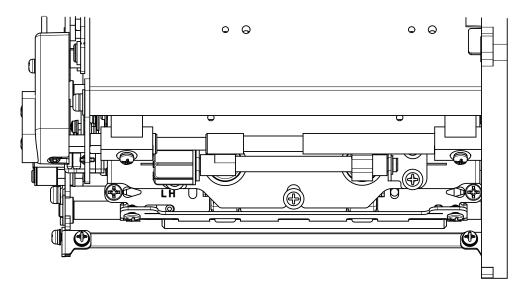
, Print Head Adjustment, Front - Rear Balance
